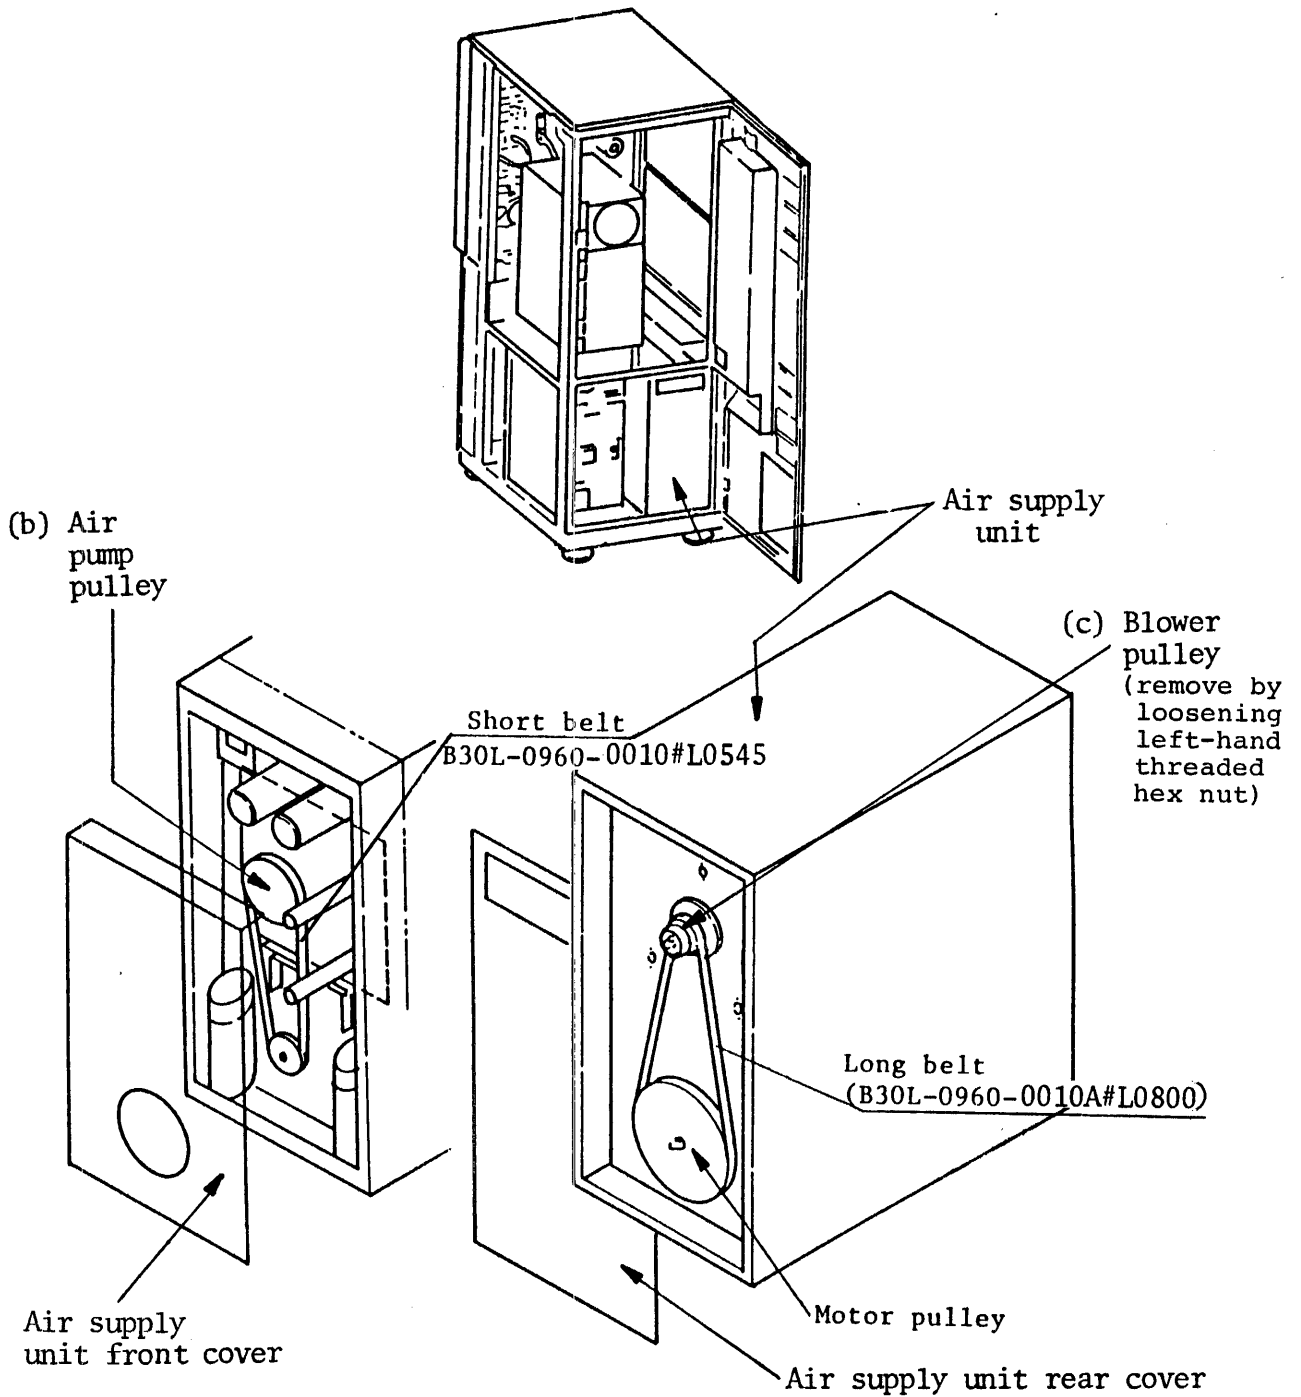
Air supply unit: vacuum blower and motor pulleys (sheet 1 of 2).
